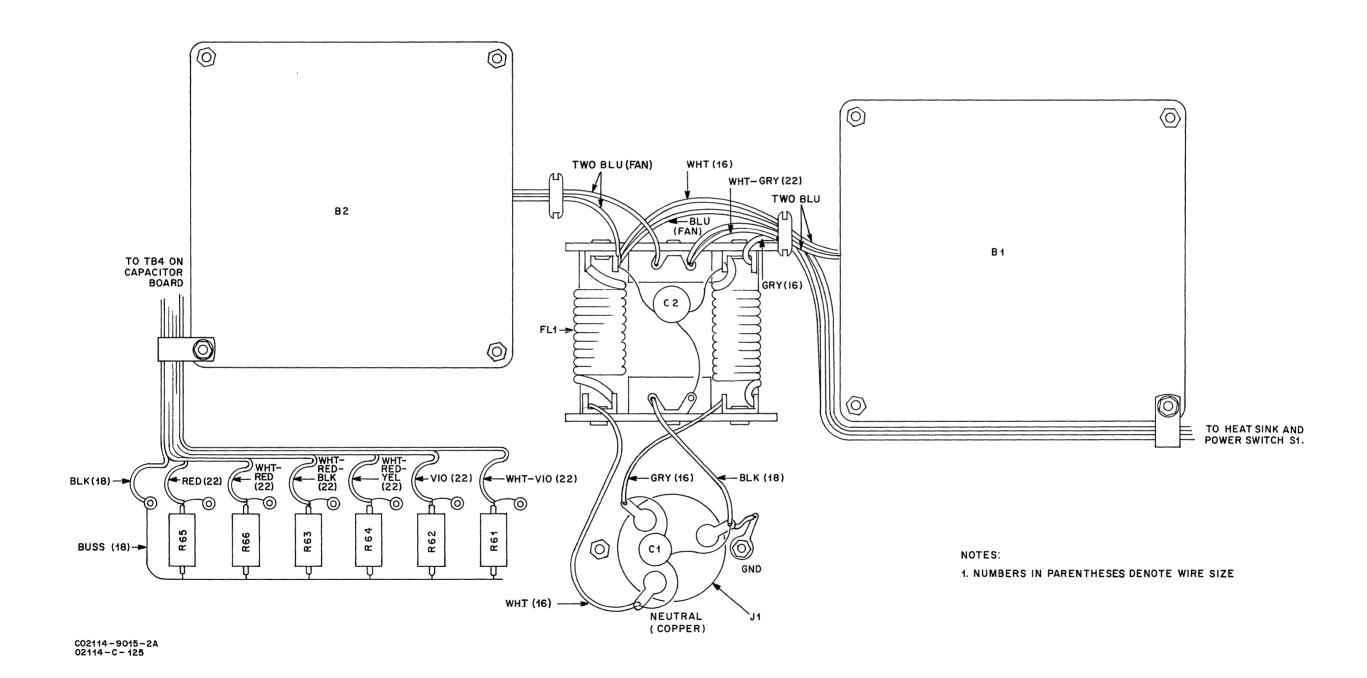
Rear Panel Assembly (02114-0009), Part Location Diagram and Wiring Diagram
